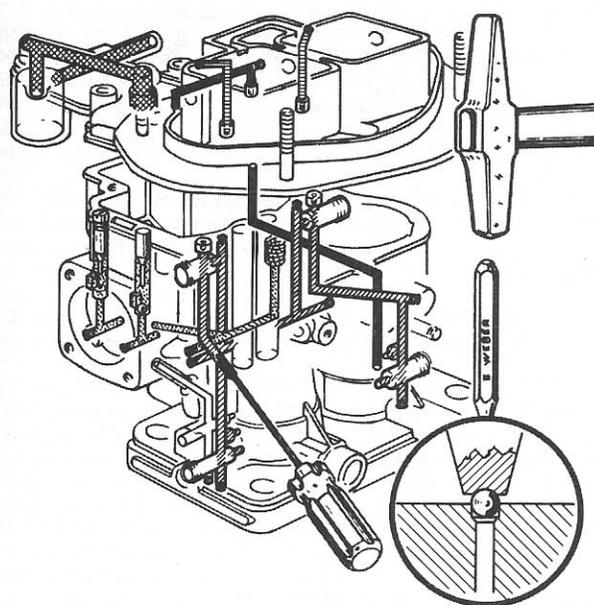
Location of the carburettor internal channels and method of fitting the lead plugs (Sec 6)
